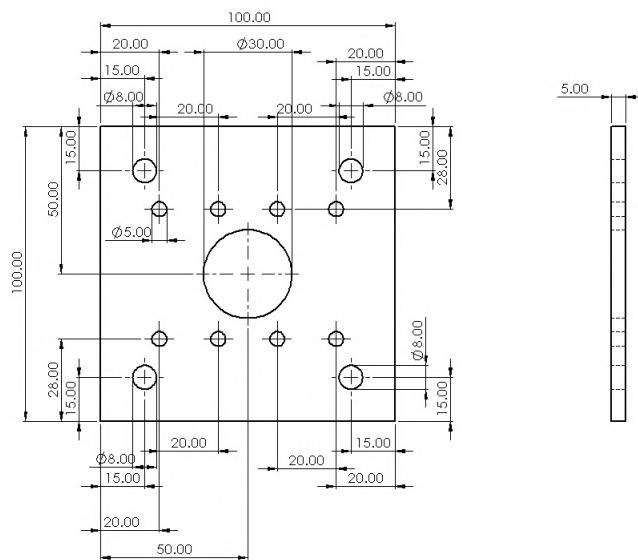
2D Drawing of the spring supporter (All dimensions are in mm)
